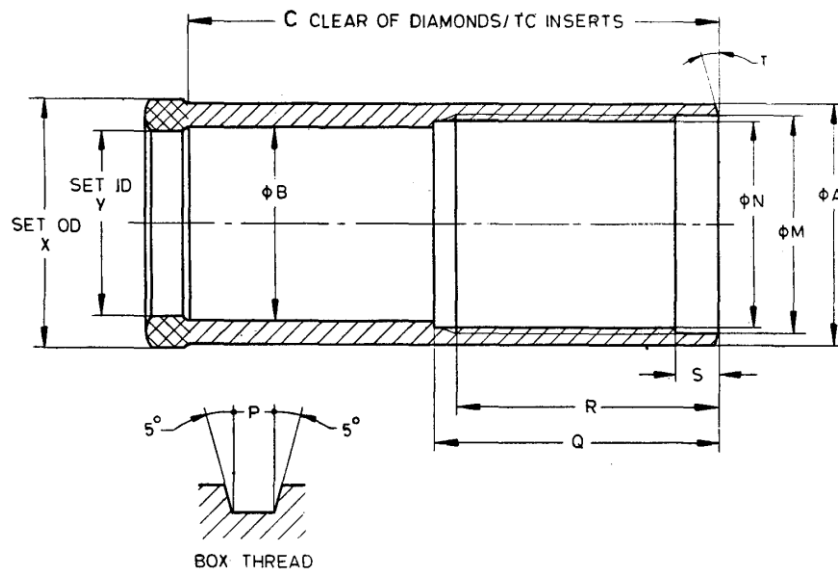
'W' DESIGN FLUSH JOINTED CASINGS — CASING SHOE BIT
